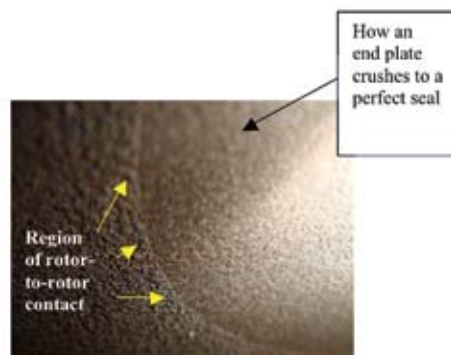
After mating surfaces of rotors sweep over each other, contact region is compressed permanently and burnished.
